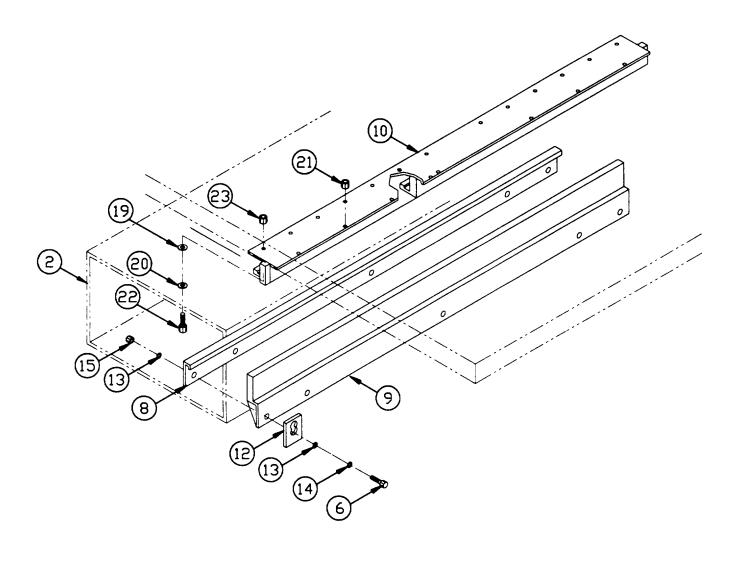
SHELTER AND MOUNTINGS (SHEET 2 OF 3)
